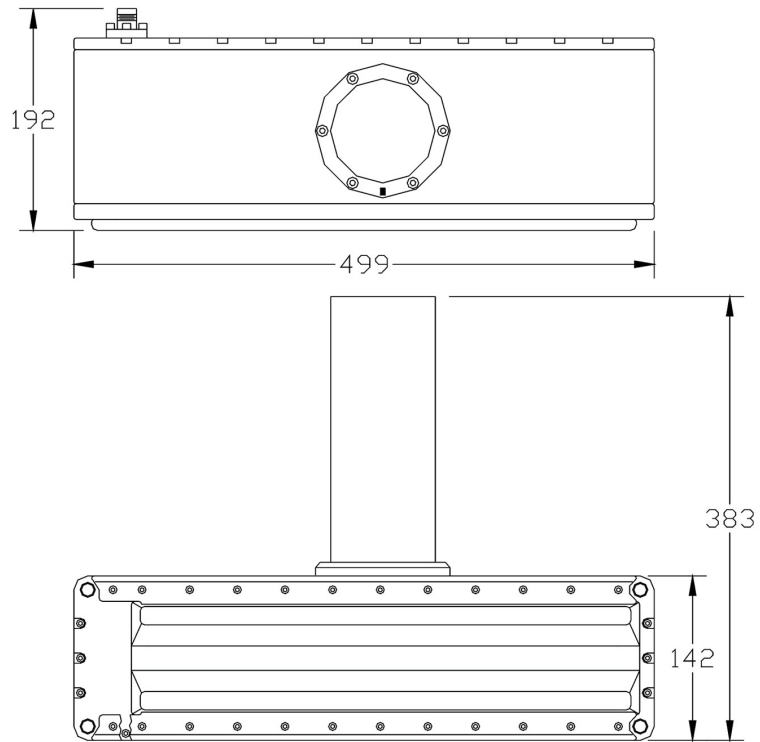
, SeaBat 8125 Sonar Head Dimensions (in mm)
